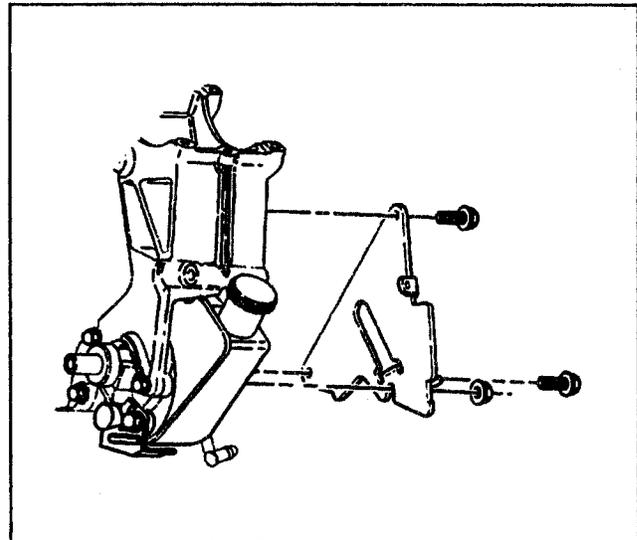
Power Steering Pump Mounting (7.4L Engines)
